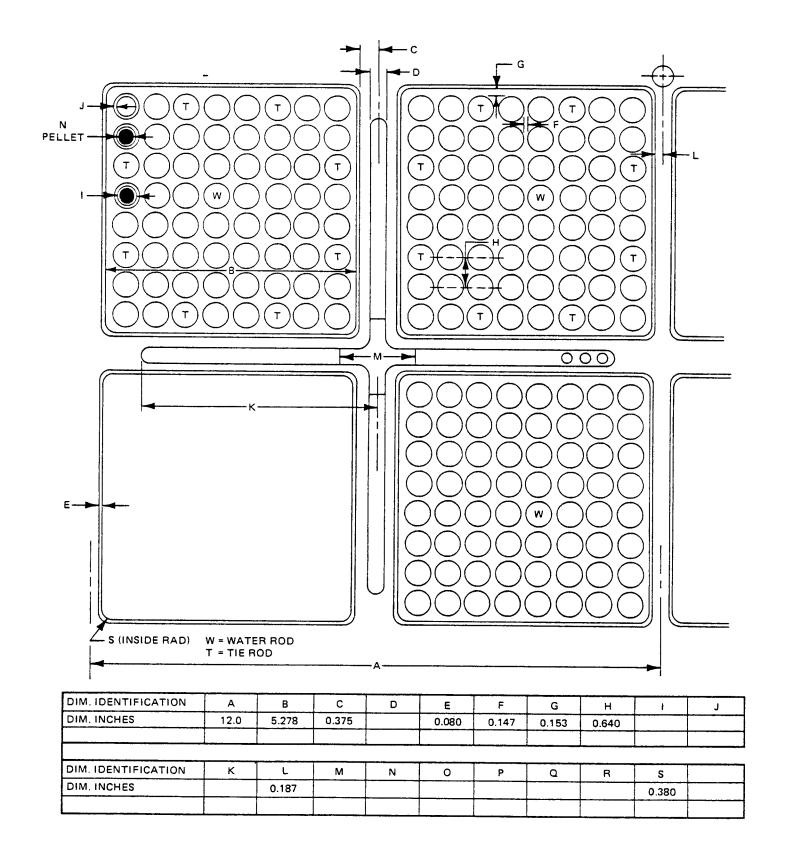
Reload-2 Fuel Assembly Lattice for 80-mil Channels
